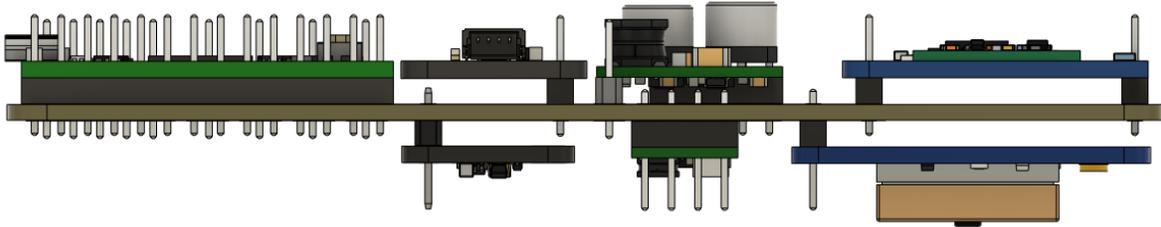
UAV PCB 3D Board (Side Profile)
